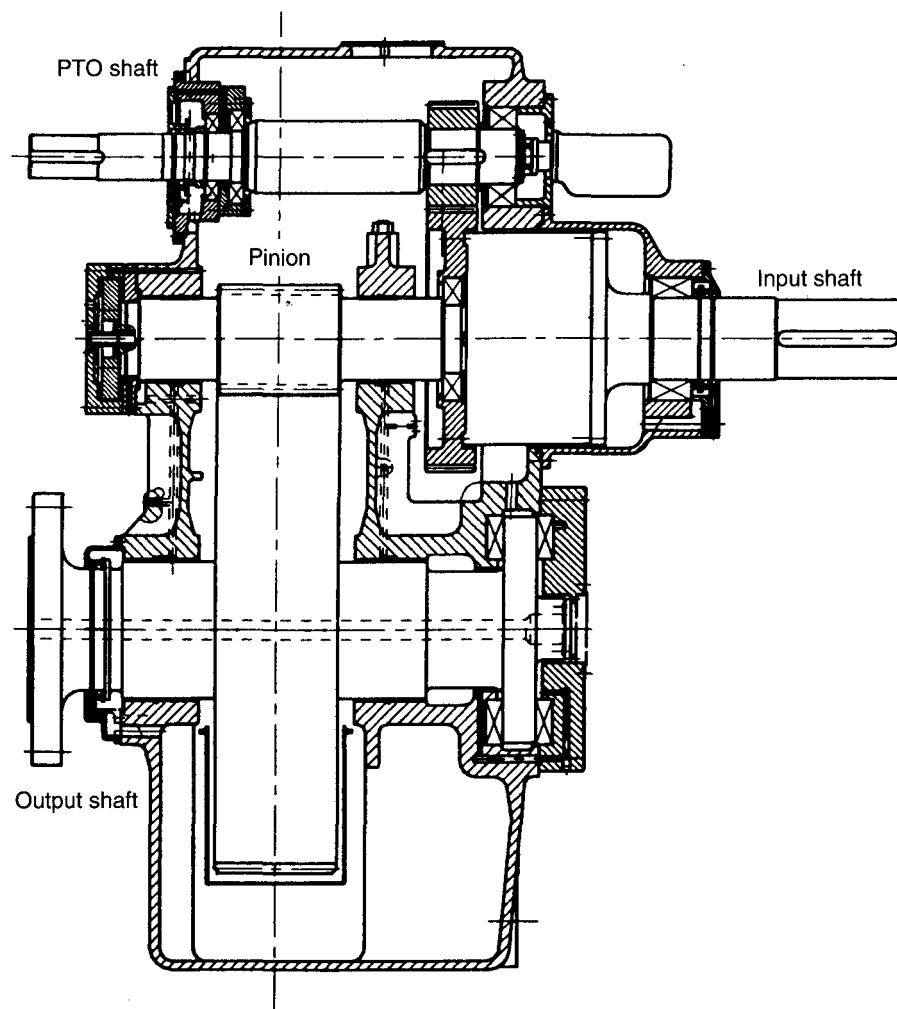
Single reduction gear. Courtesy Wartsila Diesel, Inc.
